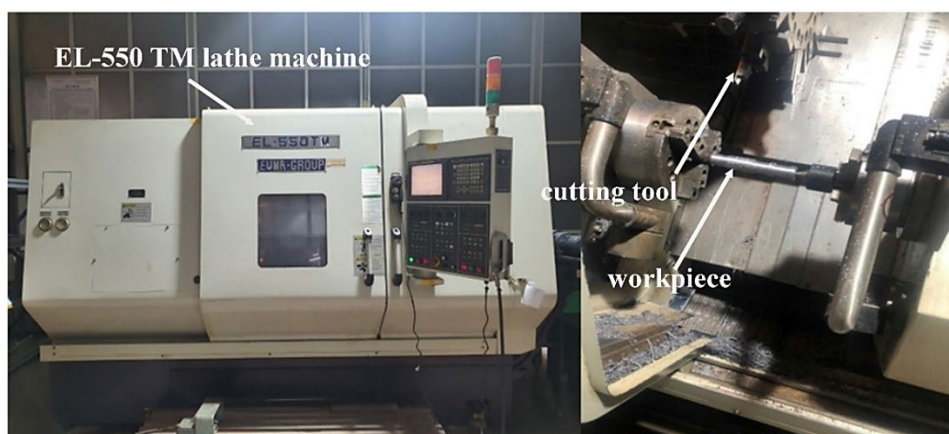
EL-550 TM model lathe machine and experiment workpiece
